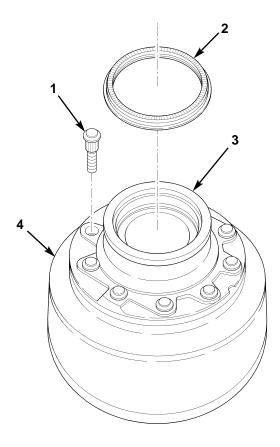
Installing Bearing Cones, Wheel Studs, and Rear Tone Ring.
